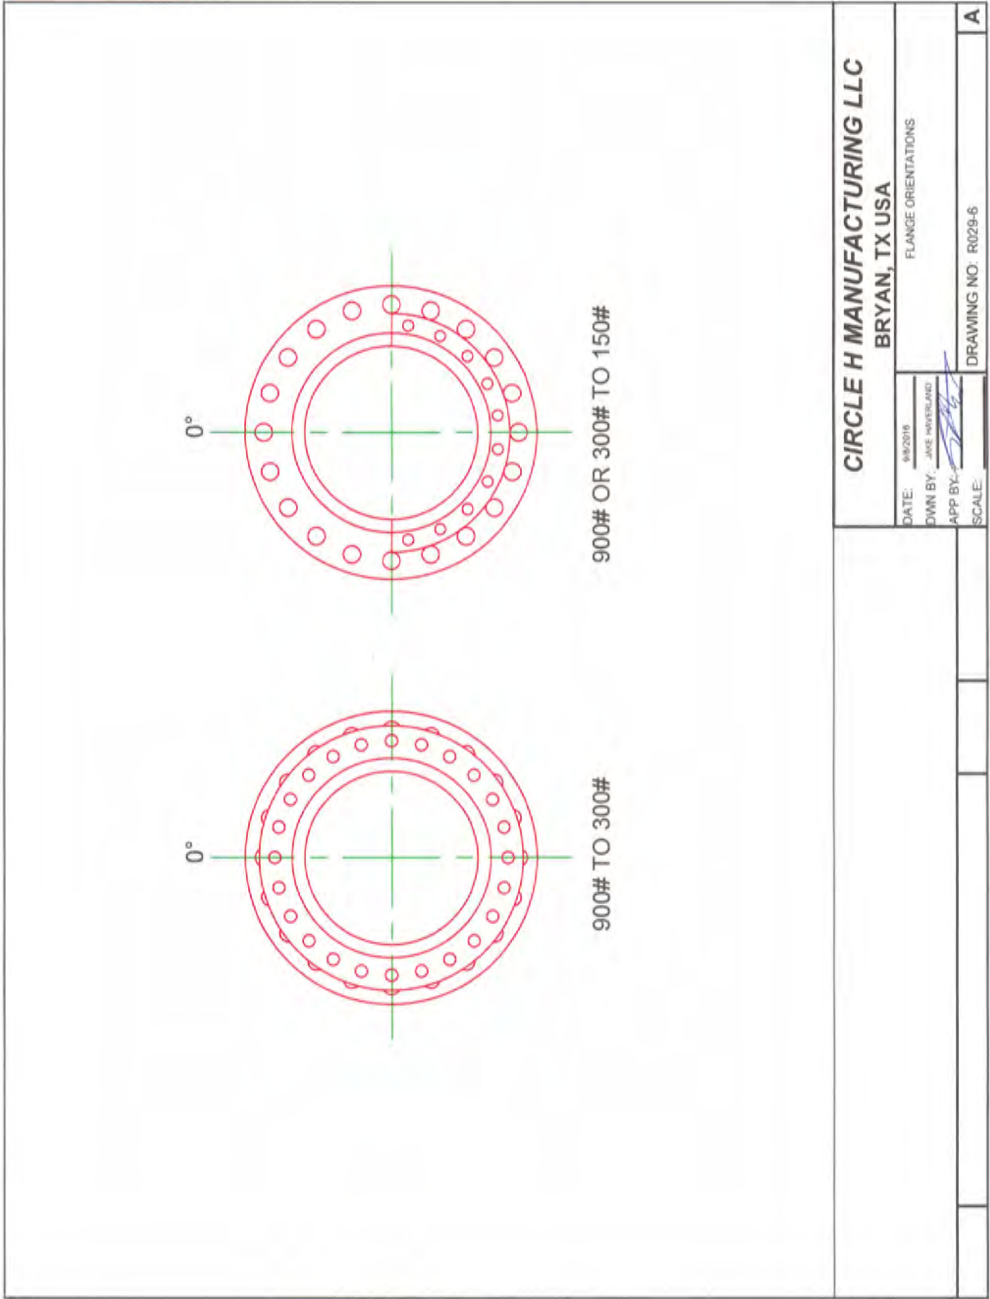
CIRCLE H MANUFACTURING DRAWING DETAILING THE HOLE ALIGNMENT OF THE FLANGES RELATIVE TO ONE ANOTHER.
